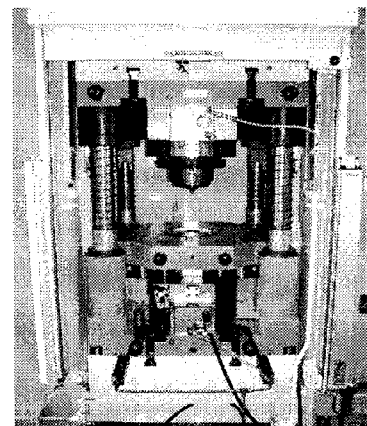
A double-action link-type hydraulic enclosed forging die set, used in this study
